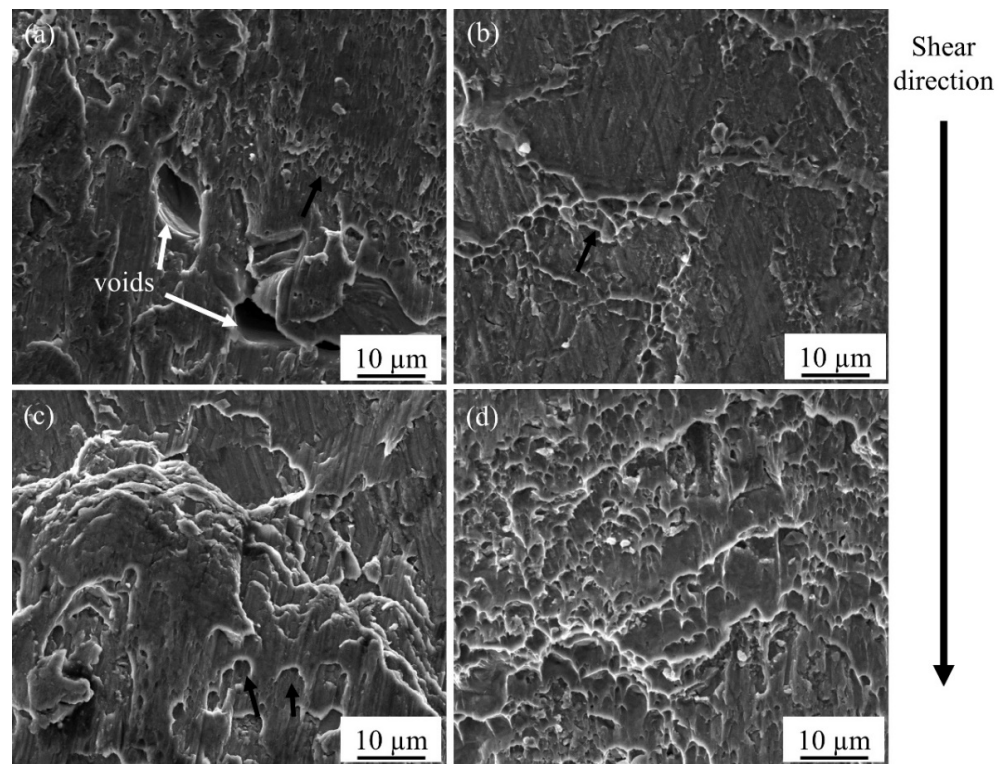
Fractography of the fracture surfaces of AA6061 joints diffusion bonded for 240 min at temperatures of (a) 500 °C, (b) 510 °C, (c) 520 °C, and (d) 530 °C.
